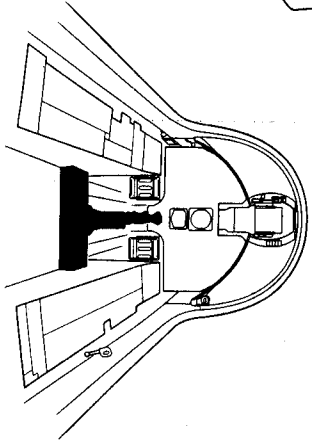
Control Stick Assembly Removal and Installation (Sheet 1)
